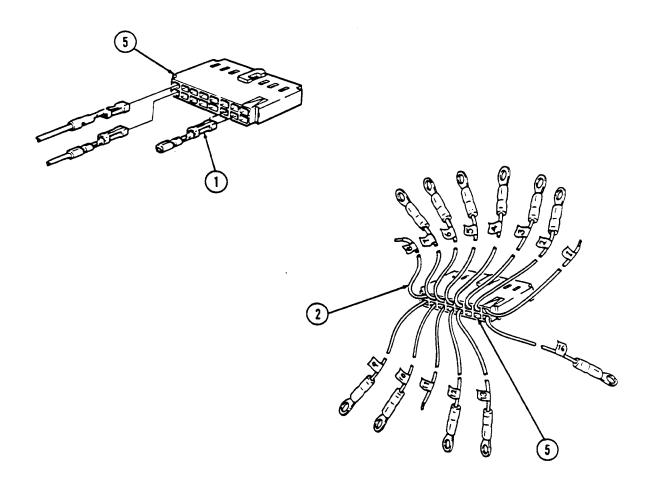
Receptacle Plug and Pin Assemblies (Cont'd).
